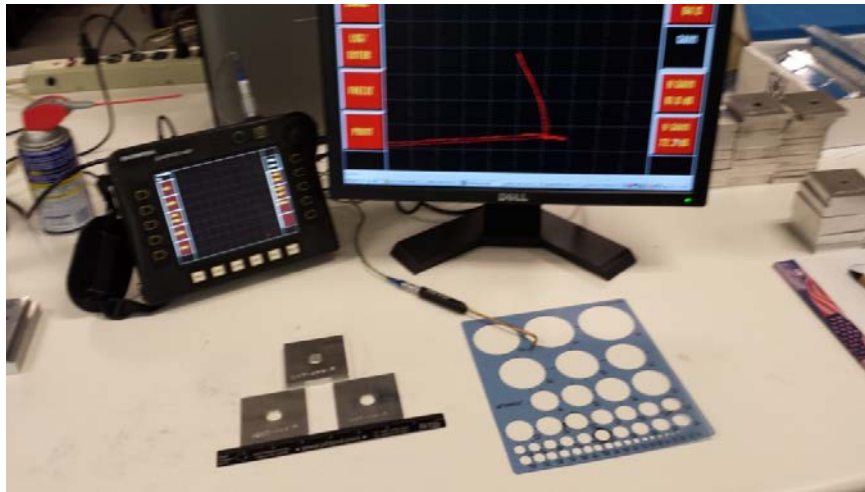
Equipment for the ET - SS inspection of cold worked hole specimens.
